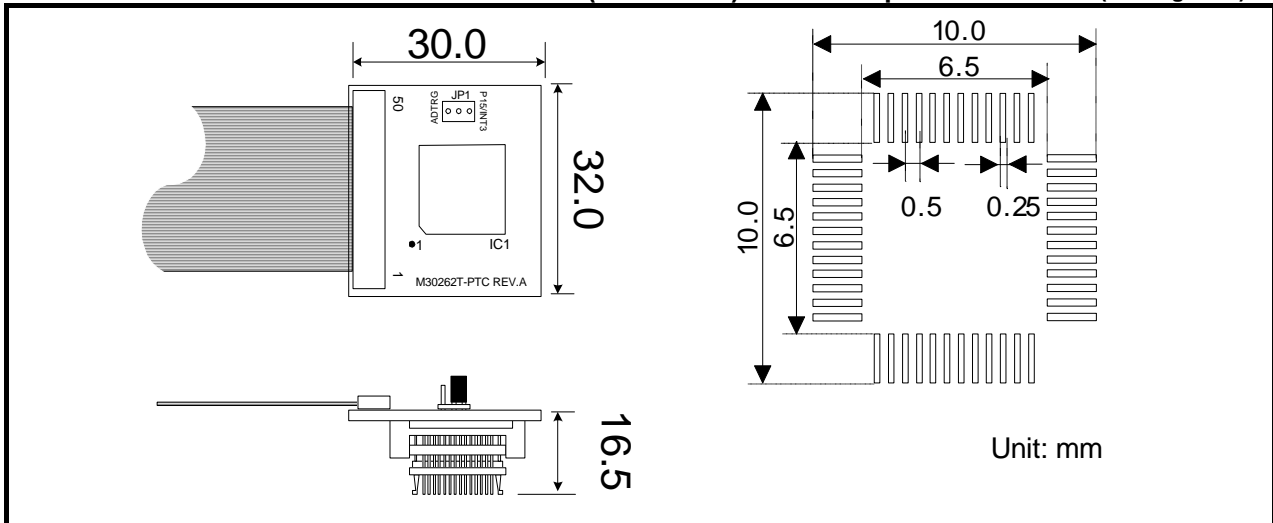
External dimensions of M30262T-PTC and sample foot pattern
